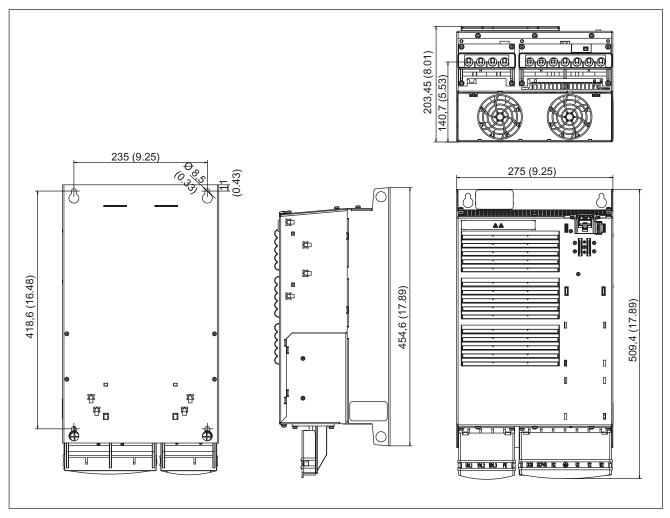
Dimension drawing: Power Module PM340 with integrated line filter, frame size FSD
